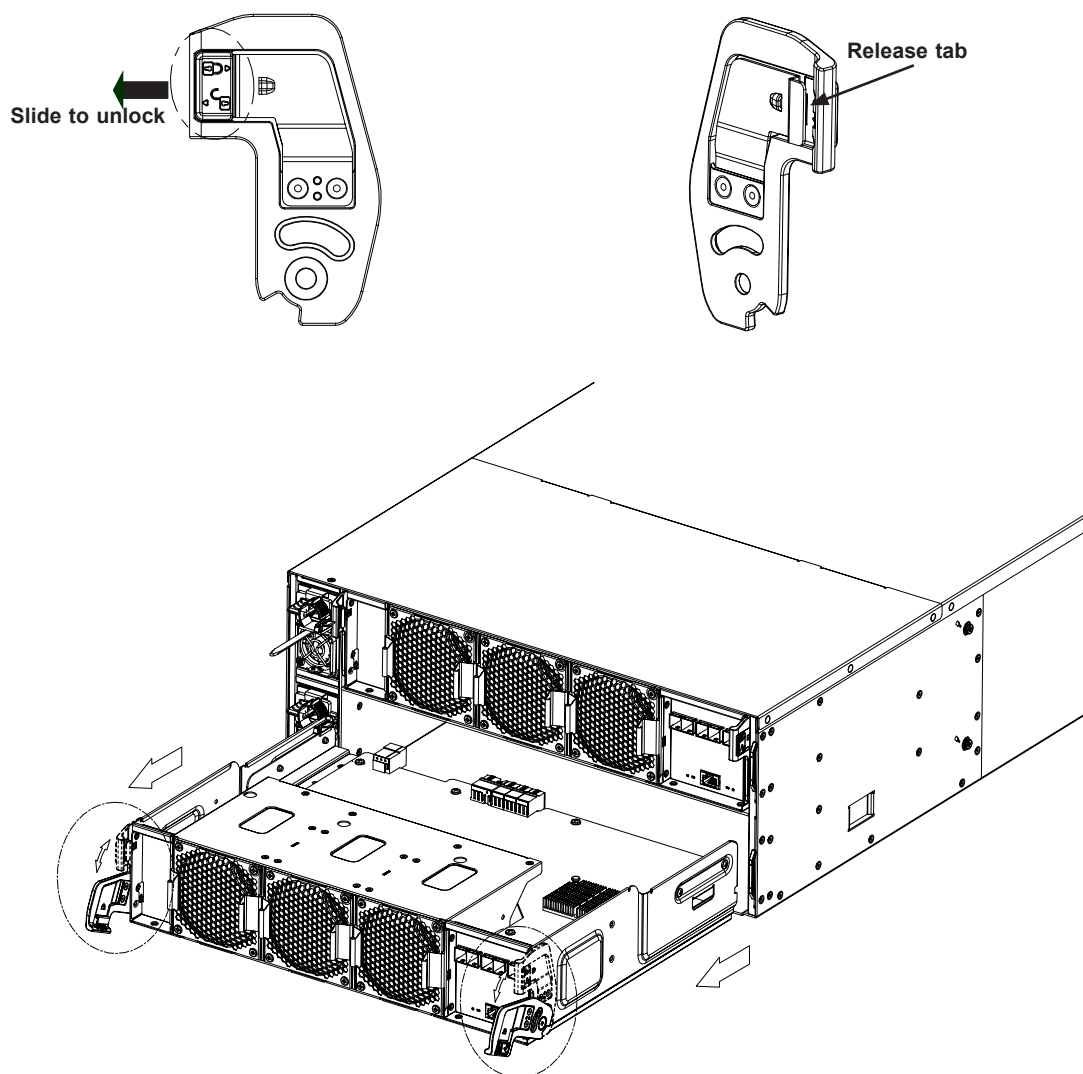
Removing an I/O Module in a JBOD Chassis
